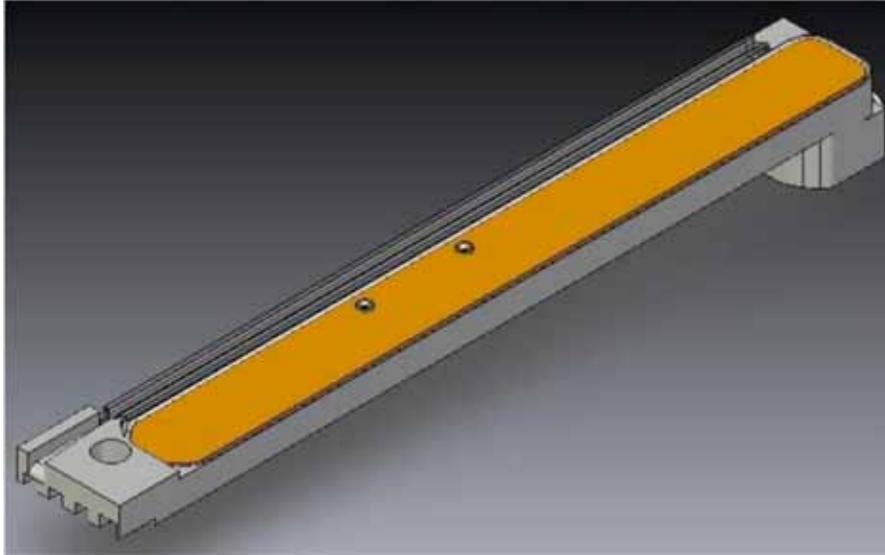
SPRAY MANIFOLD WITH INTEGRATED CARD GUIDE
